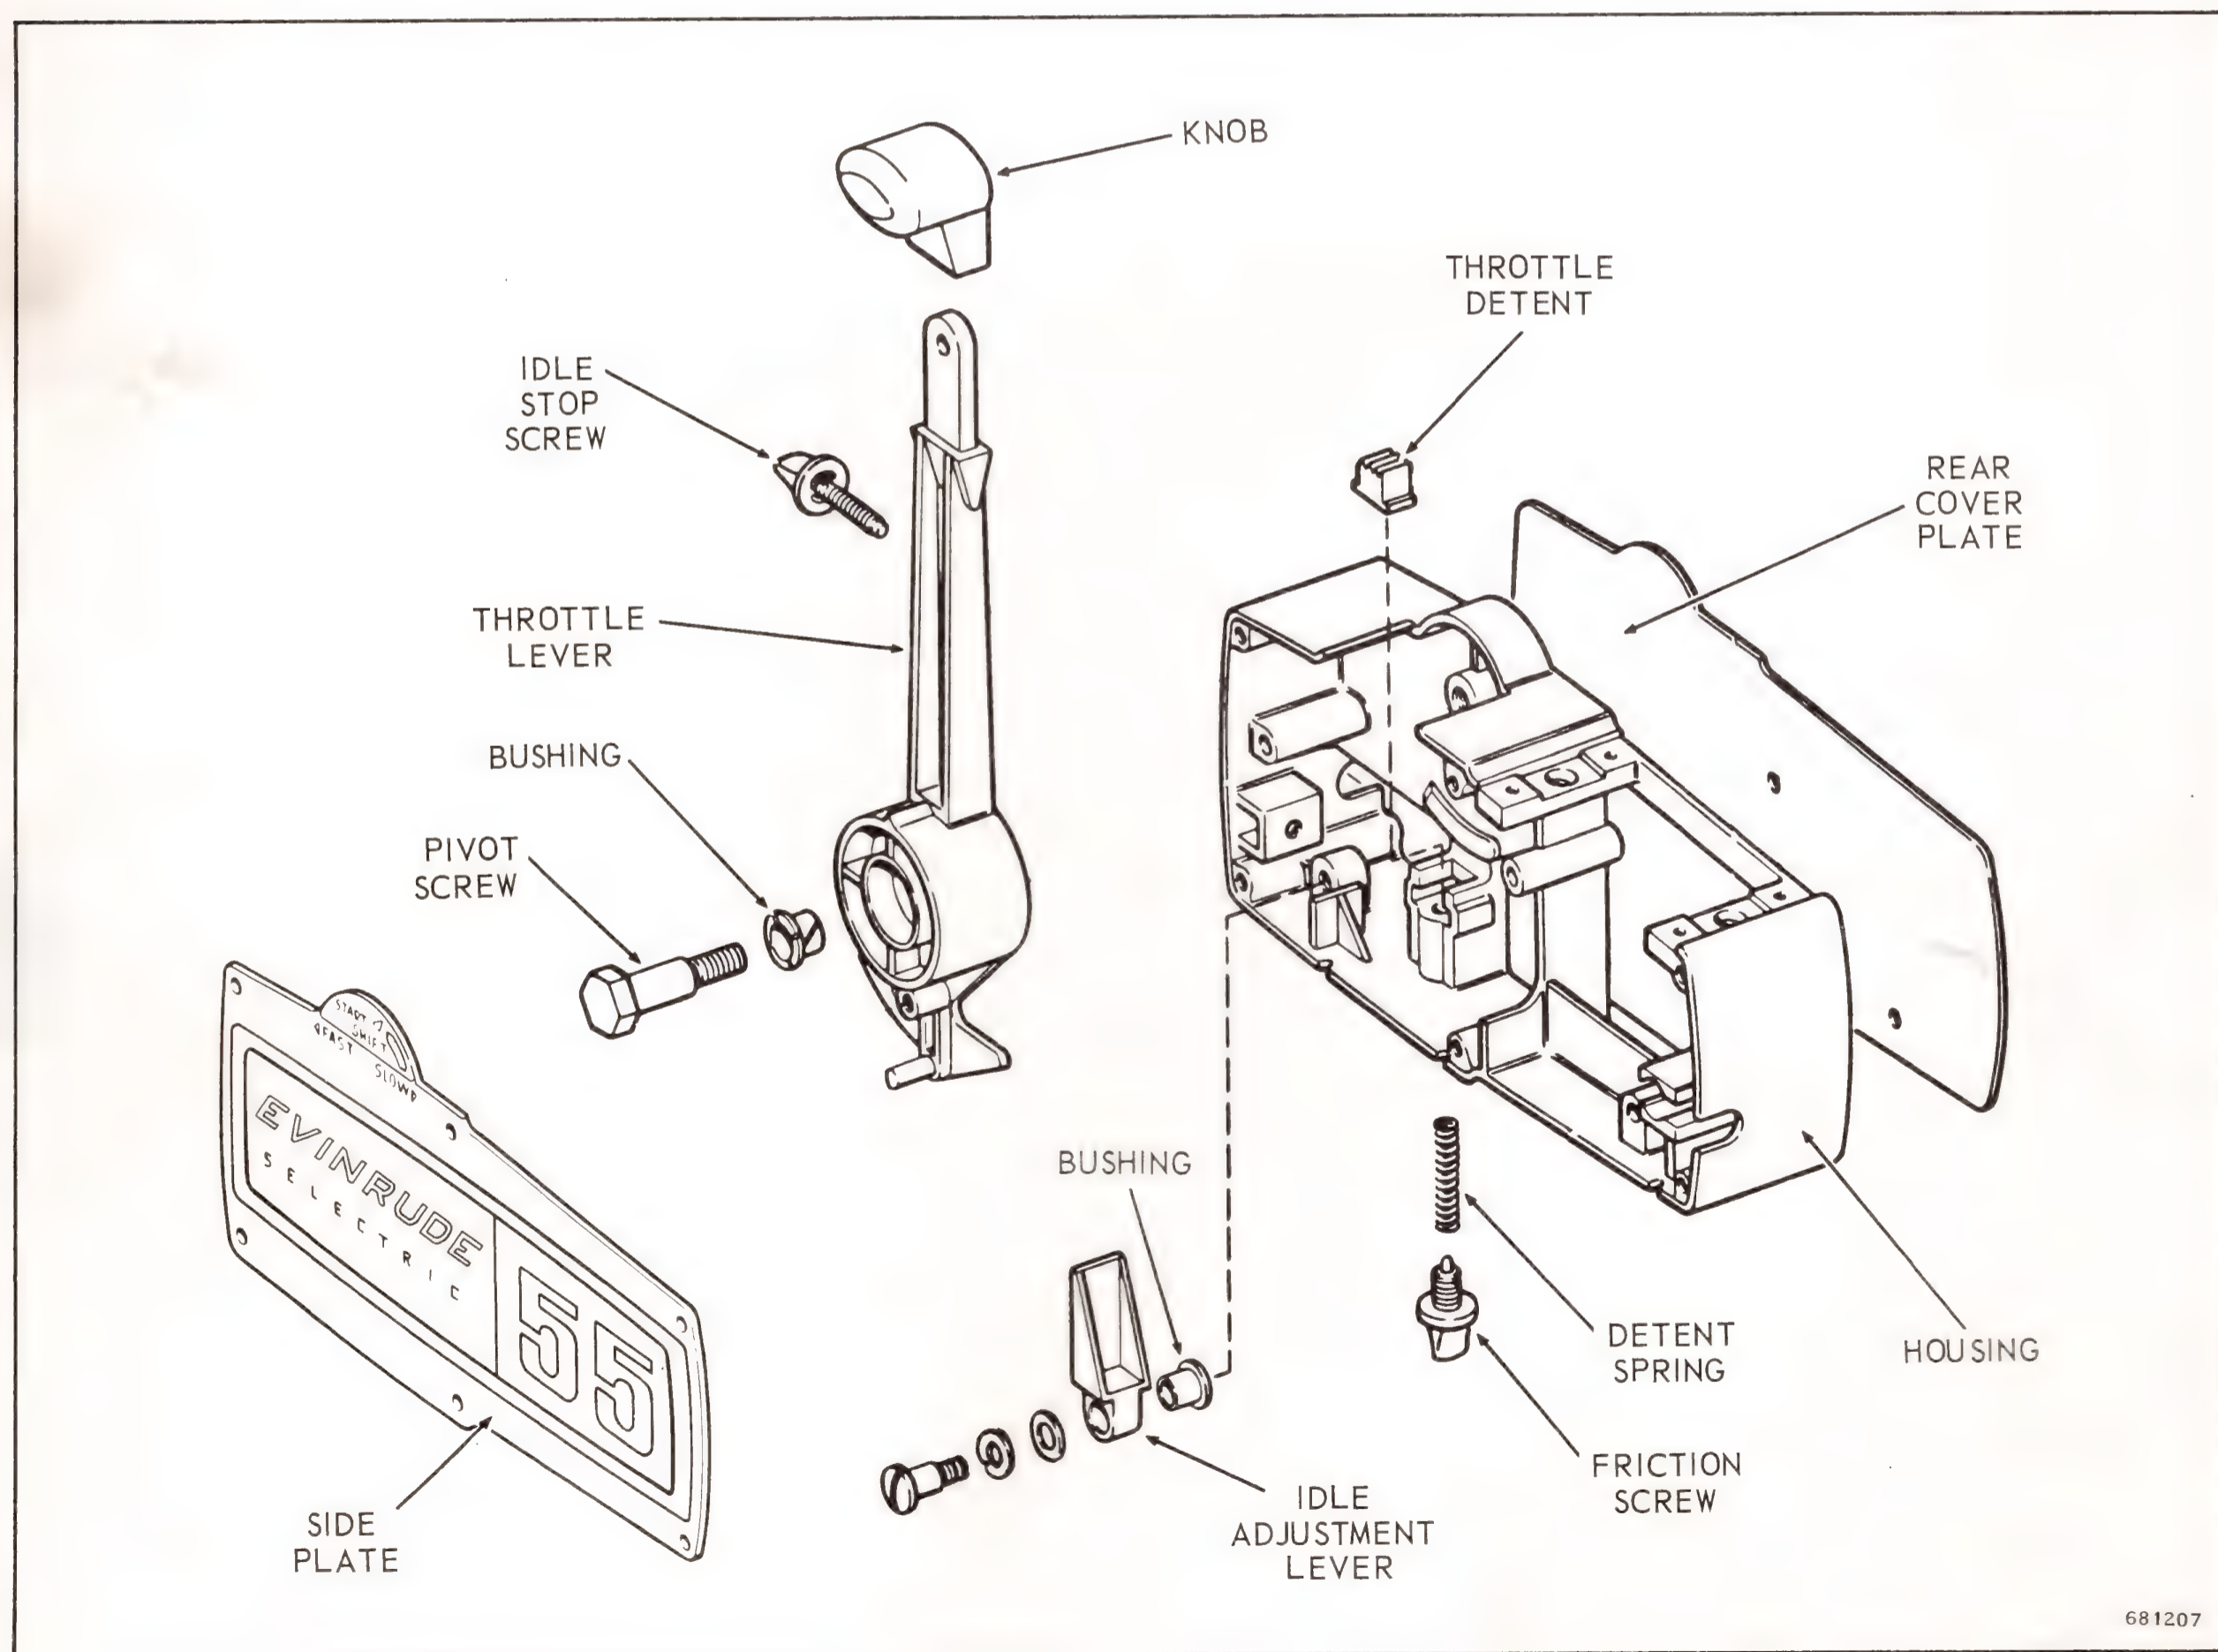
Remote Control Assembly View - Housing and Throttle Lever
